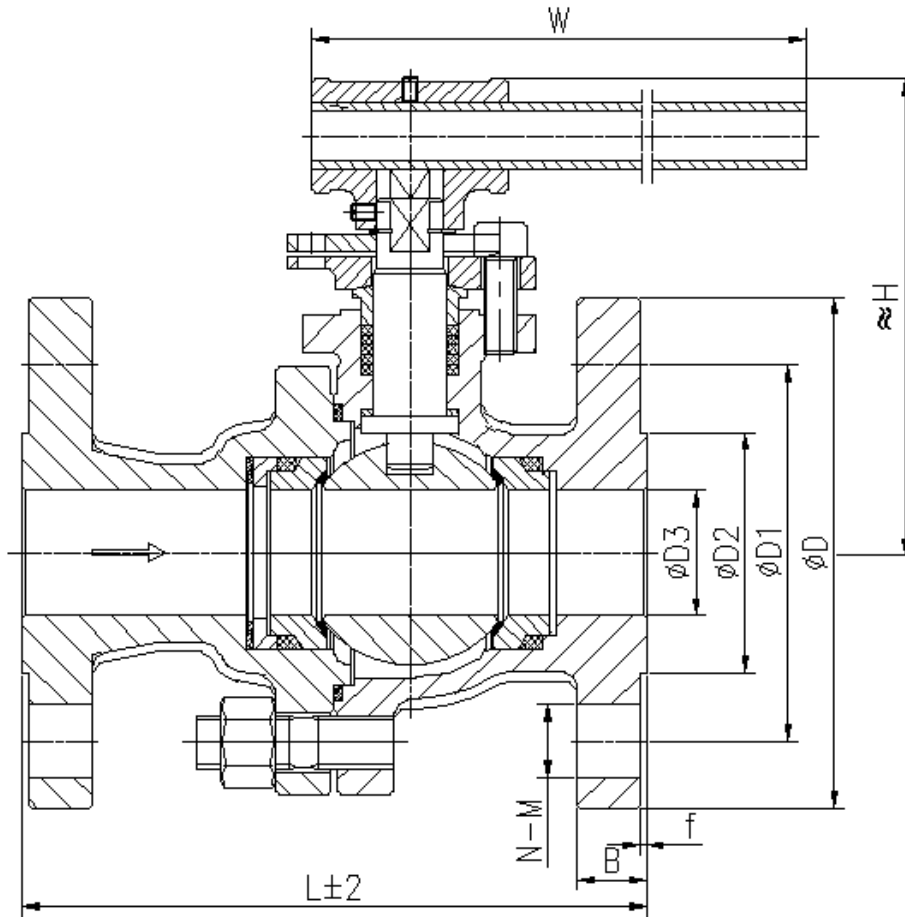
Dimensions of Linor floating ball valve with high temperature seat bare shaft, PN40, flanged, sizes DN15-100
